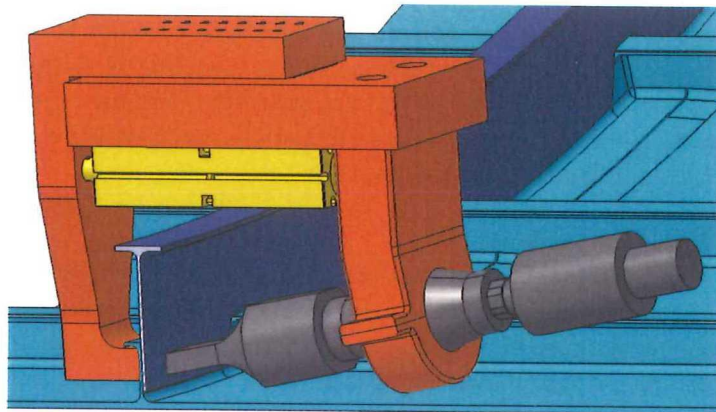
Conceptual design of tool to sequentially weld fuselage frame (dark blue) to the orthogrid panel (light blue). Clamping of fuselage frame and orthogrid panel not included. An actuator (yellow) is used to clamp the area to be welded between the anvil of the C-frame (orange) and the welding stack (grey).
